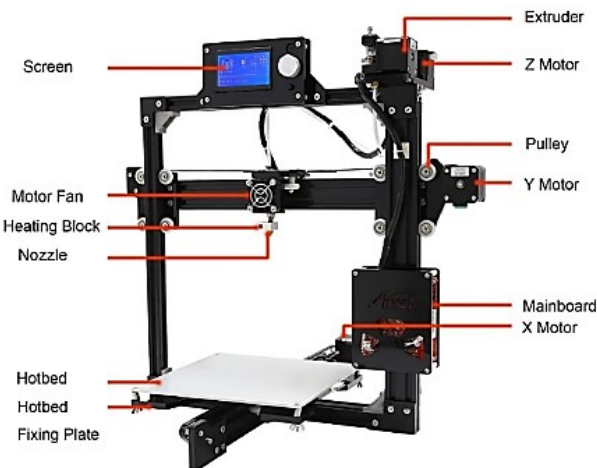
3D printer components: Fused deposition modeling (FDM) [29 – 31]
